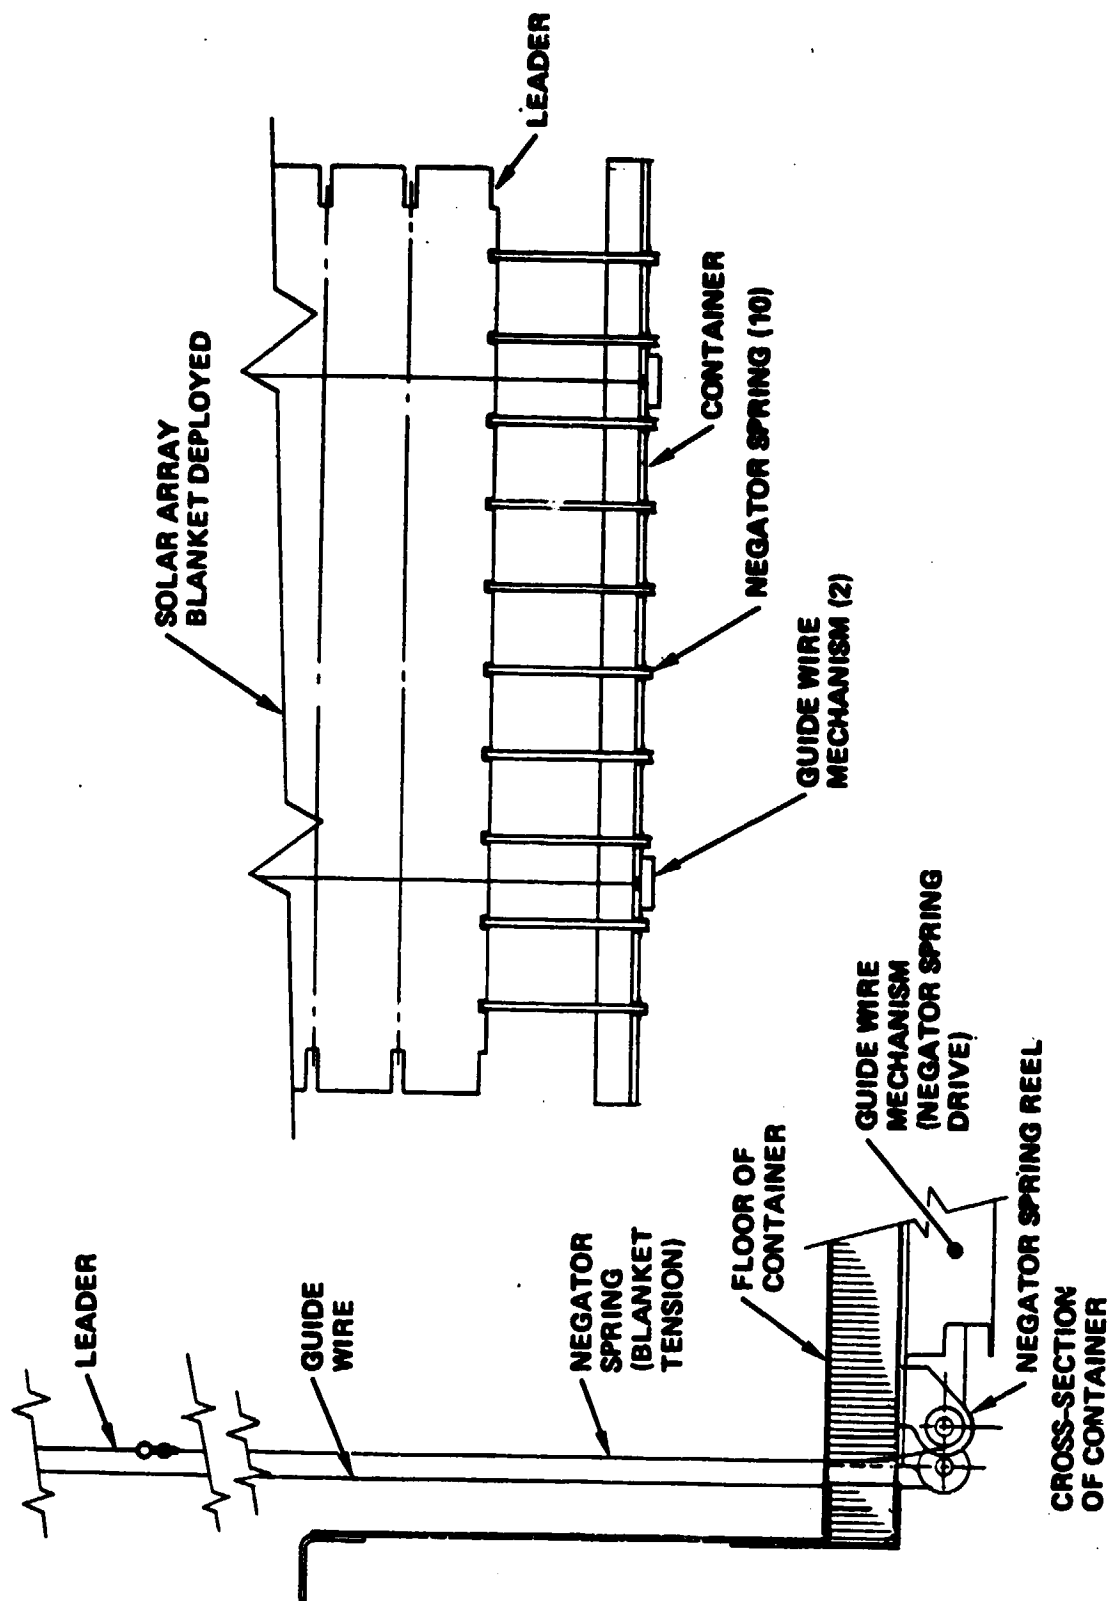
Blanket Tensioning and Guide Wire Mechanisms
